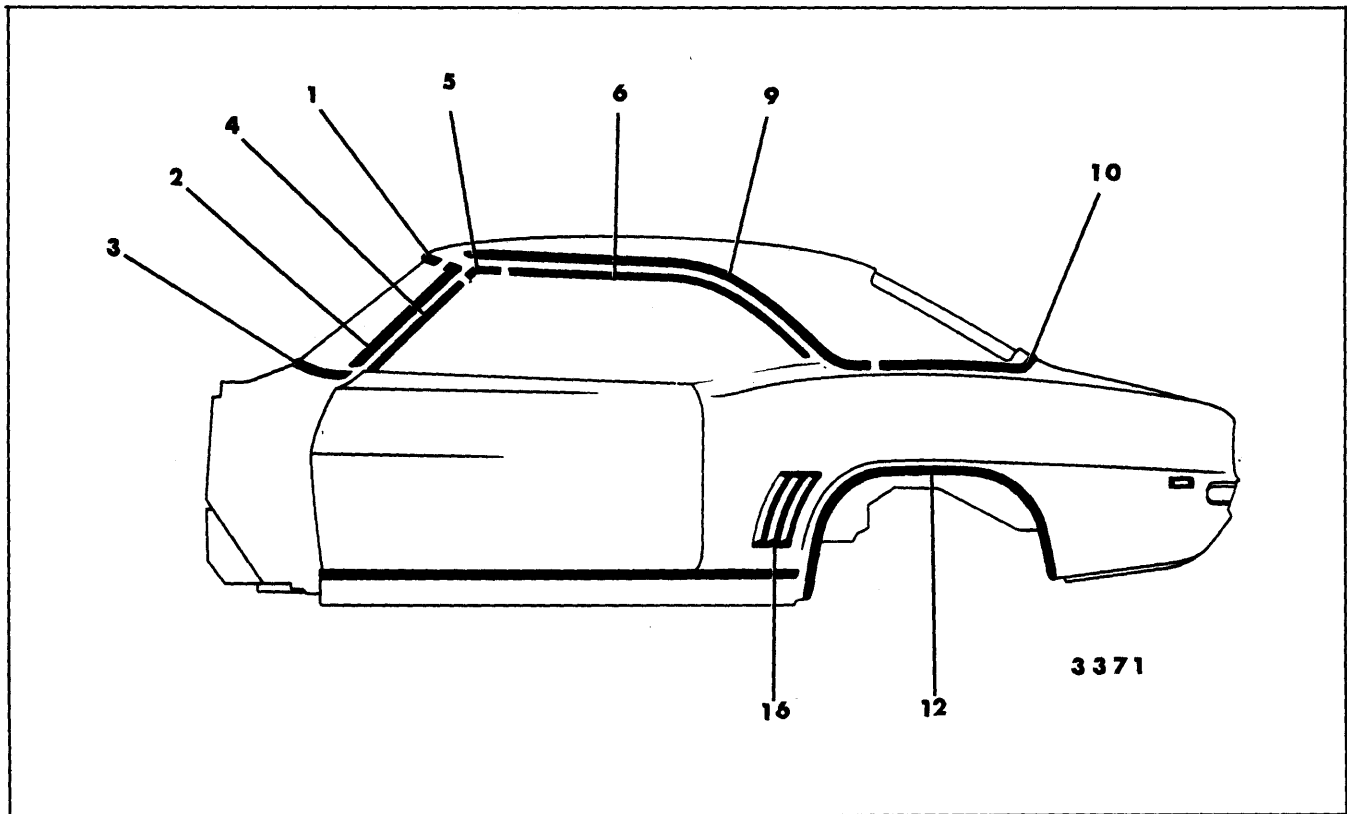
Chevrolet "F-37" Style ("67" Style Similar)
